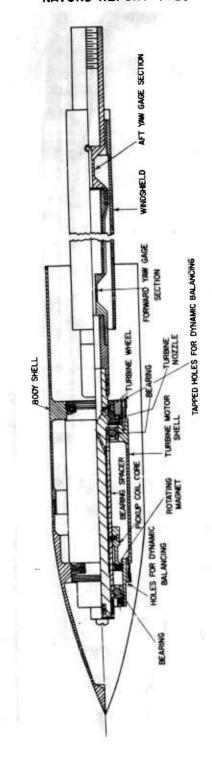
ASSEMBLY DRAWING OF THE MODEL-AIR TURBINE UNIT
